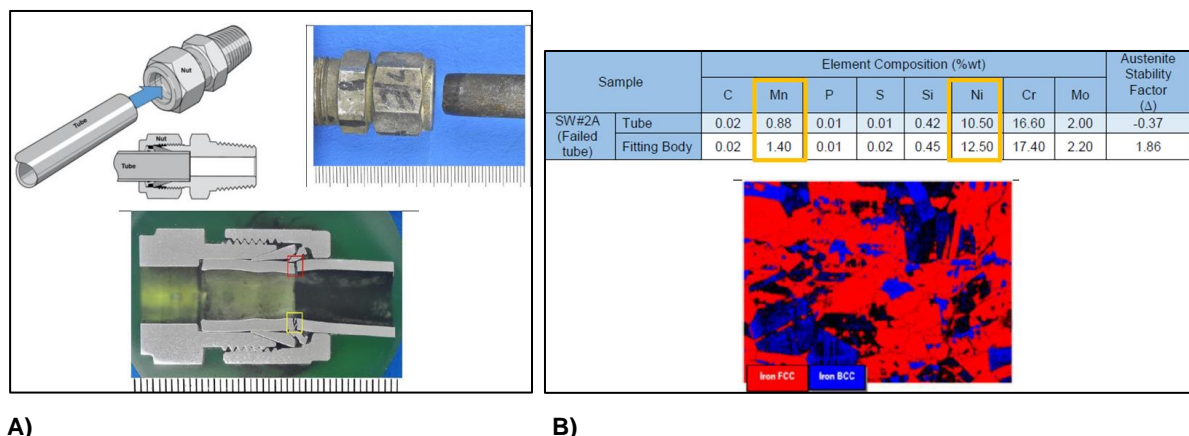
Failure of type 316L tubing in 173 bar H₂ at 55°C. A) Broken fitting. B) Post-test analysis of tube and fitting body (Ref. [25]).
